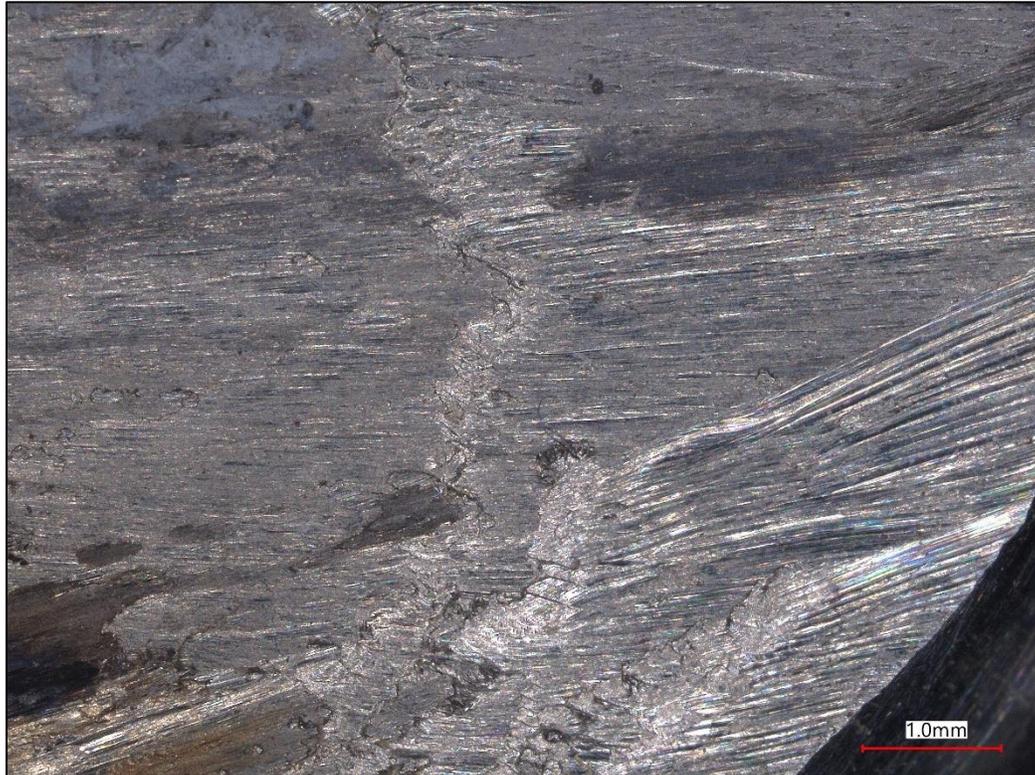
CLOSE VIEW OF SCRATCH MARKS ON FRACTURE SURFACE, BOLT C5
